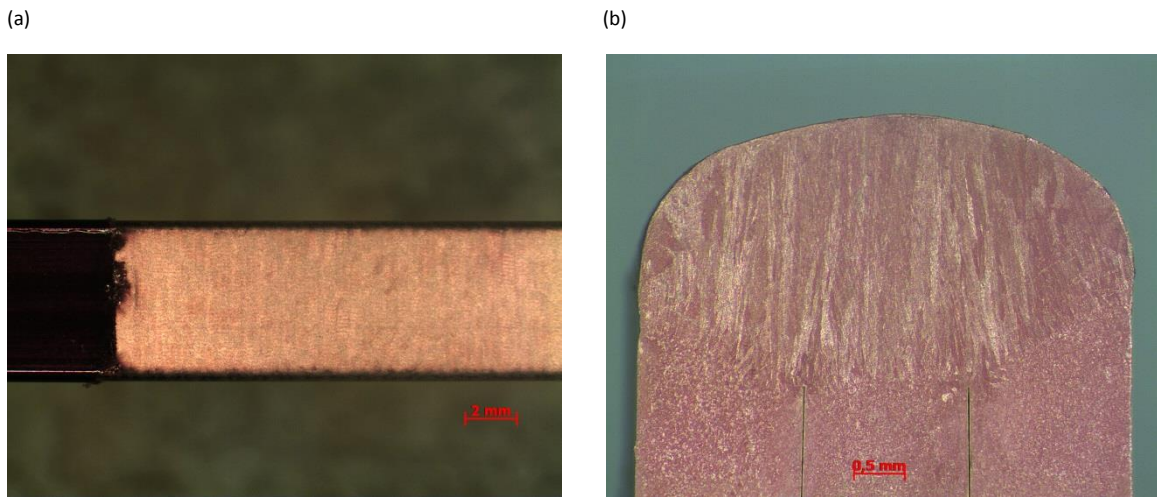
(a) Laser de-coated wire surface; (b) Cross section of wire end weld
